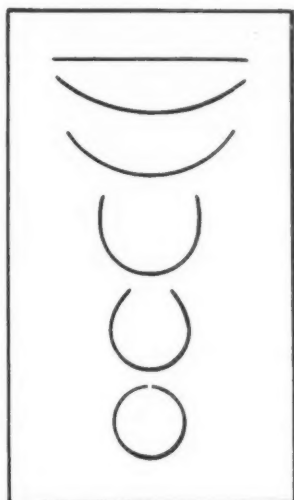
A Series of Rolls is Used to Form Strip Stock into a Cylindrical Shape, as Shown. The Pipe is then Welded with Torches or Electrodes
